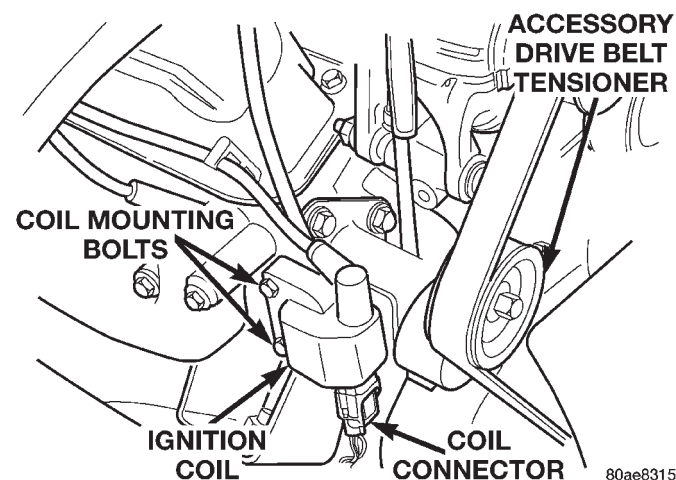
Ignition Coil—3.9L V-6 or 5.2/5.9L V-8 LDC-Gas Engines
